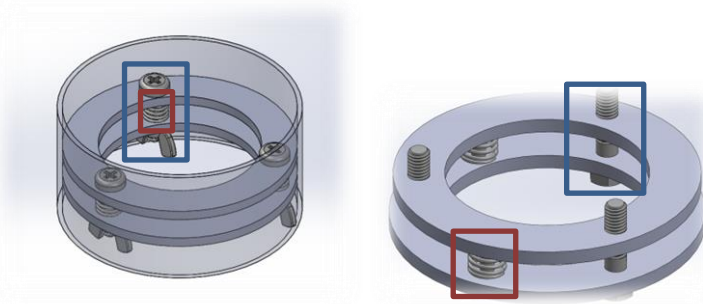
The left has nylon pyrobolts (highlighted in blue box) and springs (highlighted in red box) assembled in concert while the right has pyrobolts and springs assembled separately. This helps reduce the chance of destroying the springs which will be epoxied on one end to the steel rings. The steel rings are attached to the airframe tube using epoxy filleted on both sides.
